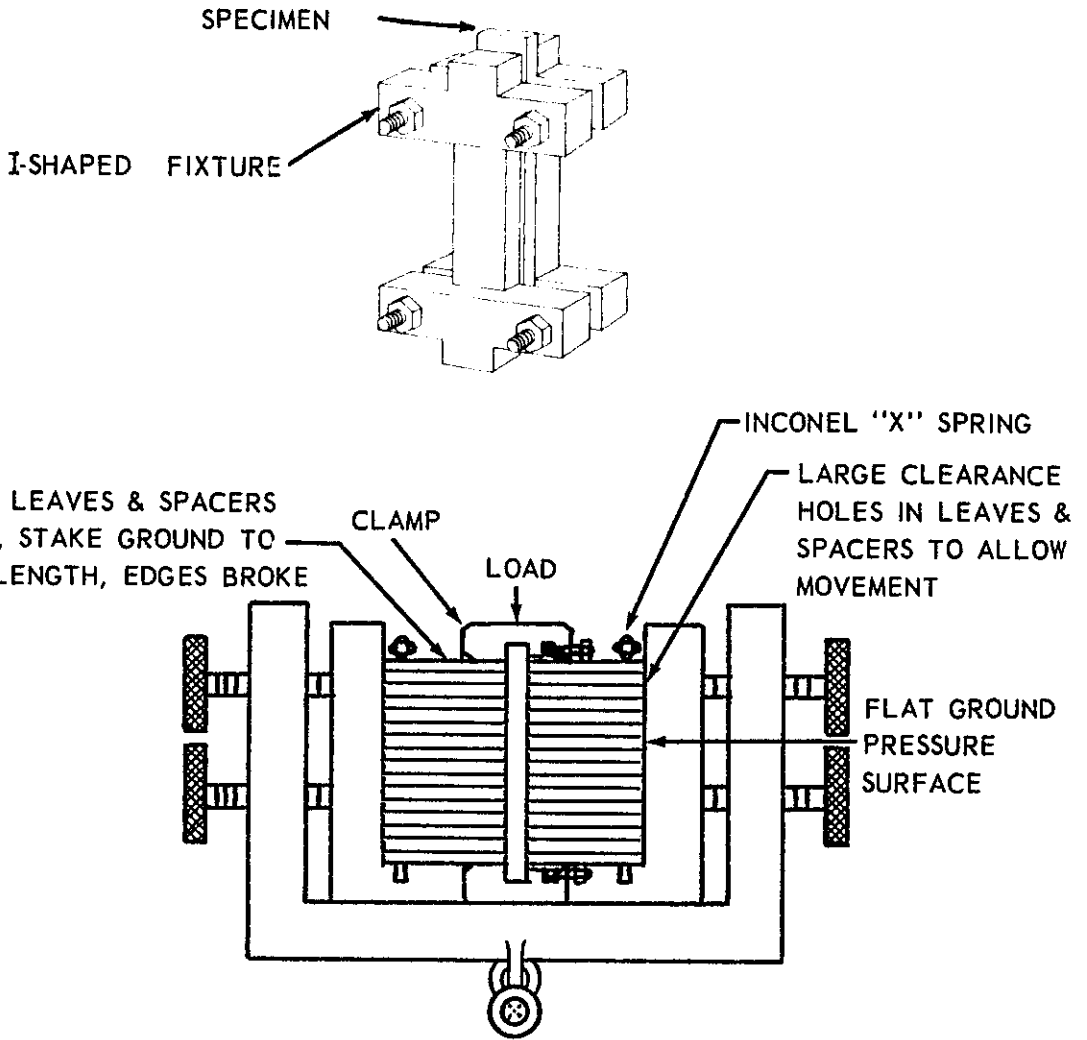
Two types of compression test fixtures; the I-Shaped Fixture specified by Federal Test Method Standard No. 406 and the Multifinger Fixture specified in ARTC Test Method.
